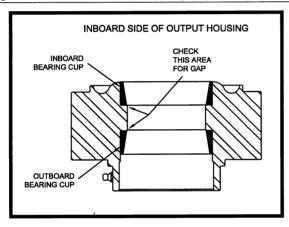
Installation of Bearing Cups in Output Housing
